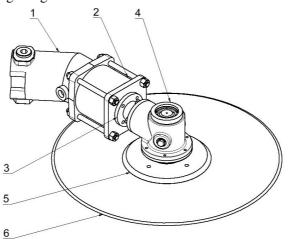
Rear transmission with hydromotor: 1 – axial piston hydromotor; 2 – coupler; 3 – extension; 4 – angular gear; 5 – carrier; 6 – cutting disc
